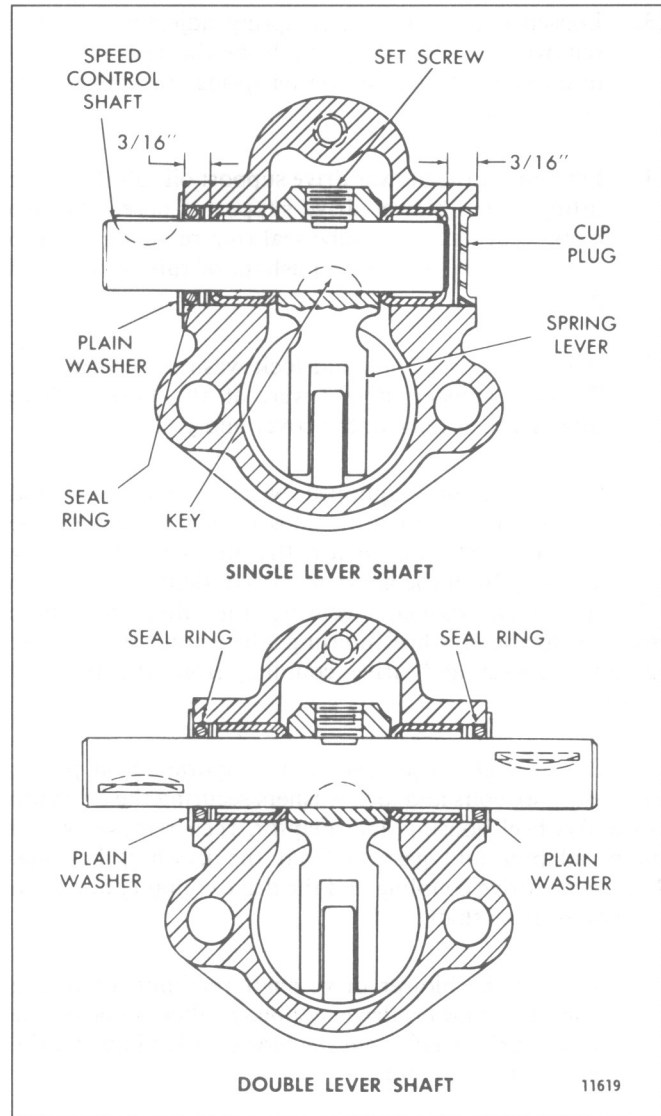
Cross Section of Governor Variable Speed Spring Housing
